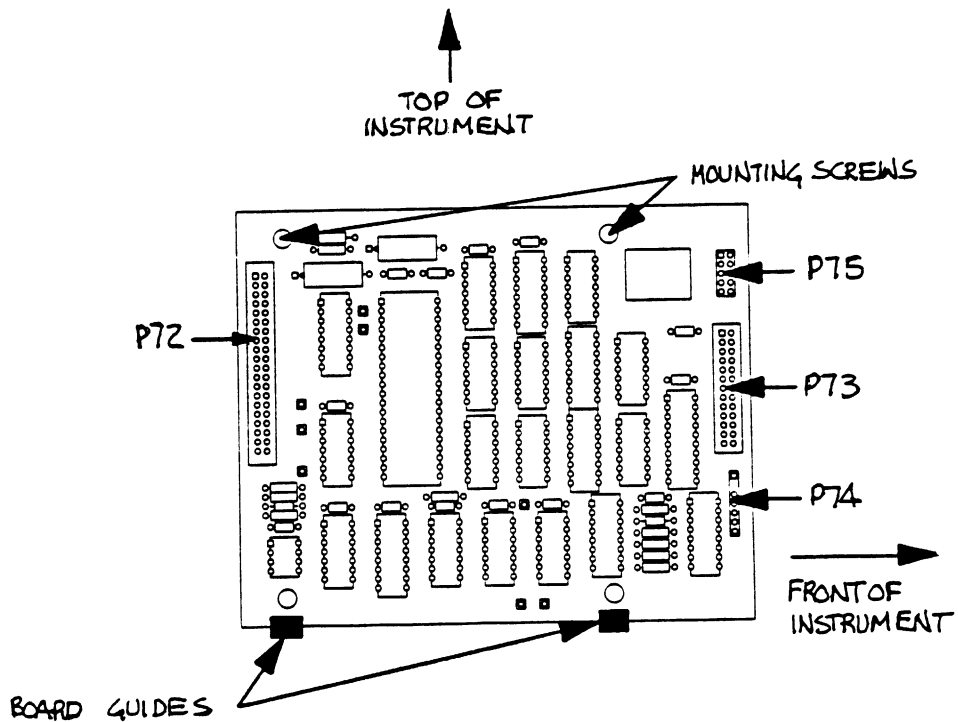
Connector locations for removal of the A10 Front Panel Control Board.
